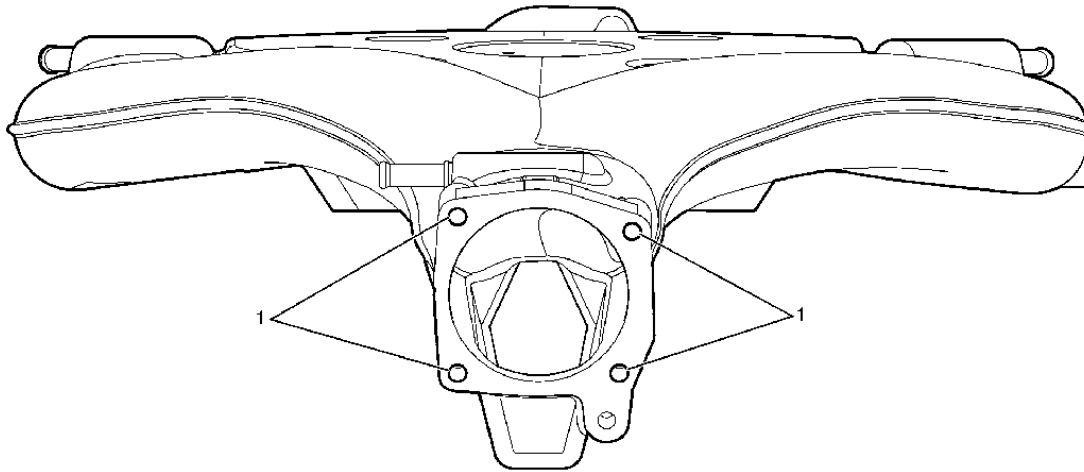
Identifying Upper Intake Manifold - Top
